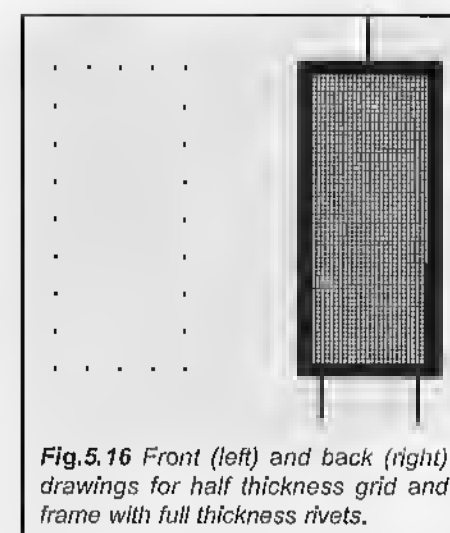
Front (left) and back (right) drawings for half thickness grid and frame with full thickness rivets.
